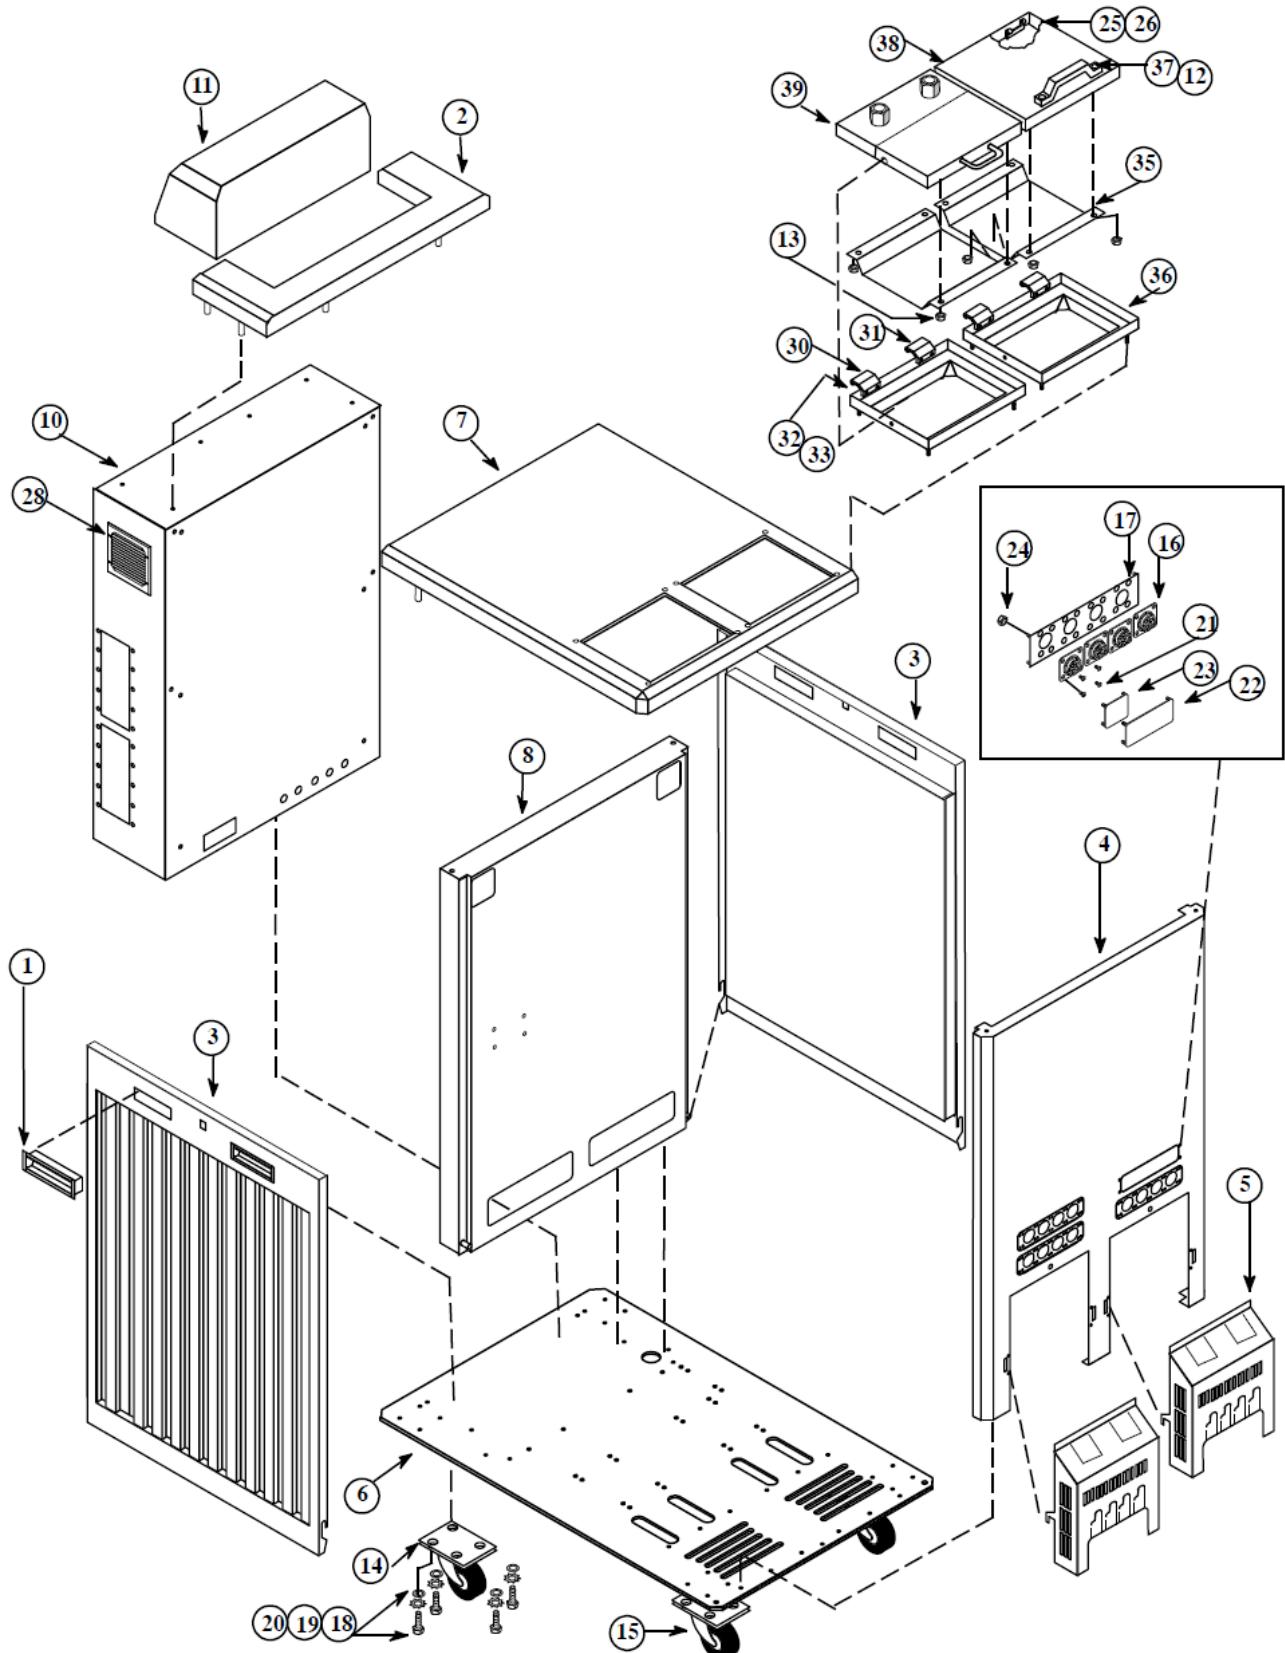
Series Cabinet Assembly, Base Assembly, PN 106046
